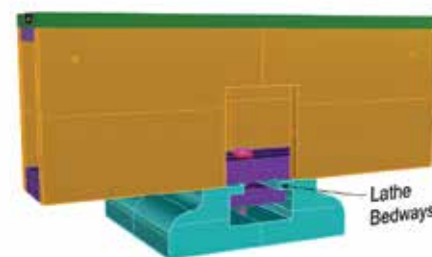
An alternate way to secure the base jig without using the banjo: bolt it directly to a movable block under the bedways.
